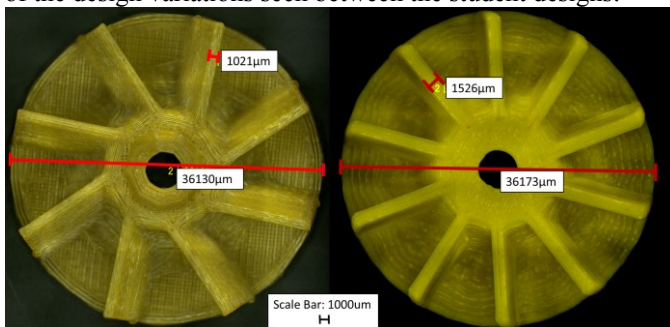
Example turbines: (Left) Printed turbine blade with 8 blades, steep blade inclination and 1021µm blade thickness, (Right) Printed turbine blade with 10 blades, less blade inclination than left turbine and 1561µm blade thickness (scale bar 1000 µm).
